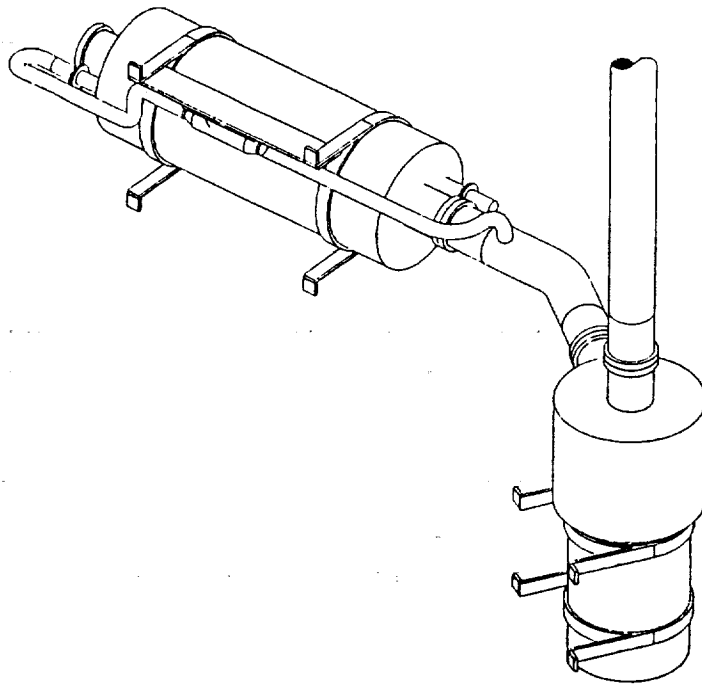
, Active TVS Mixing Pump and Heat Exchanger Layout
